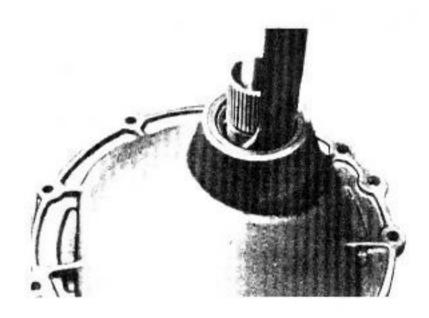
Prying out drive pinion seal. A special lever with a hooked end is used for this operation in VW shops.
